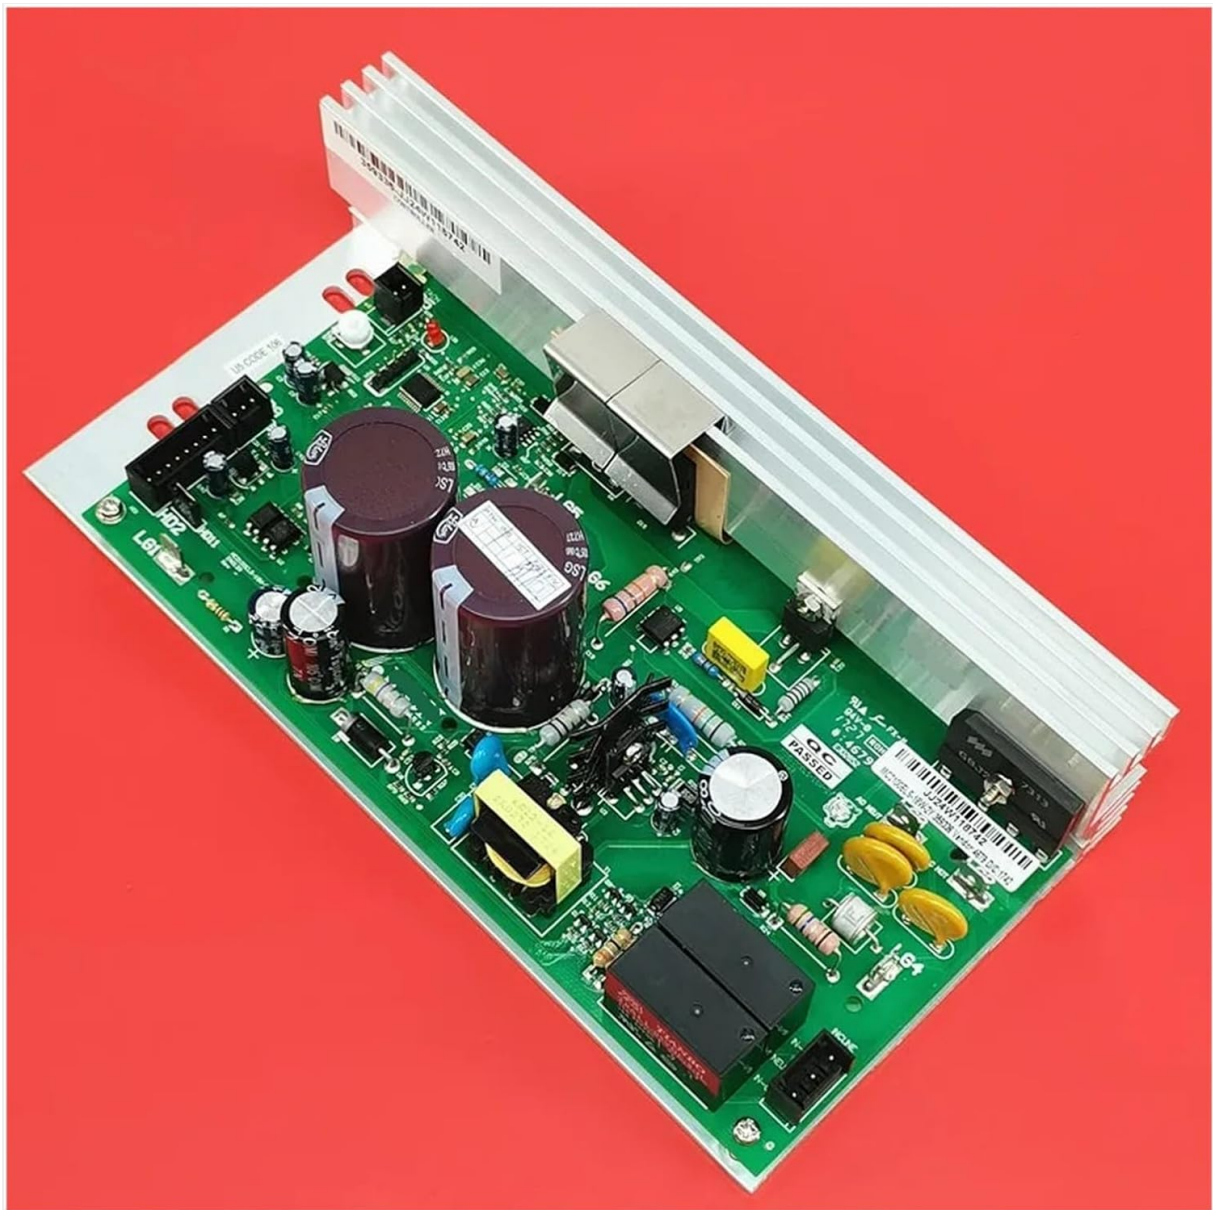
Angled view of the circuit board components of the MC2100ELS-18W-2Y controller. This view highlights the various electronic components, capacitors, and connectors on the board.
